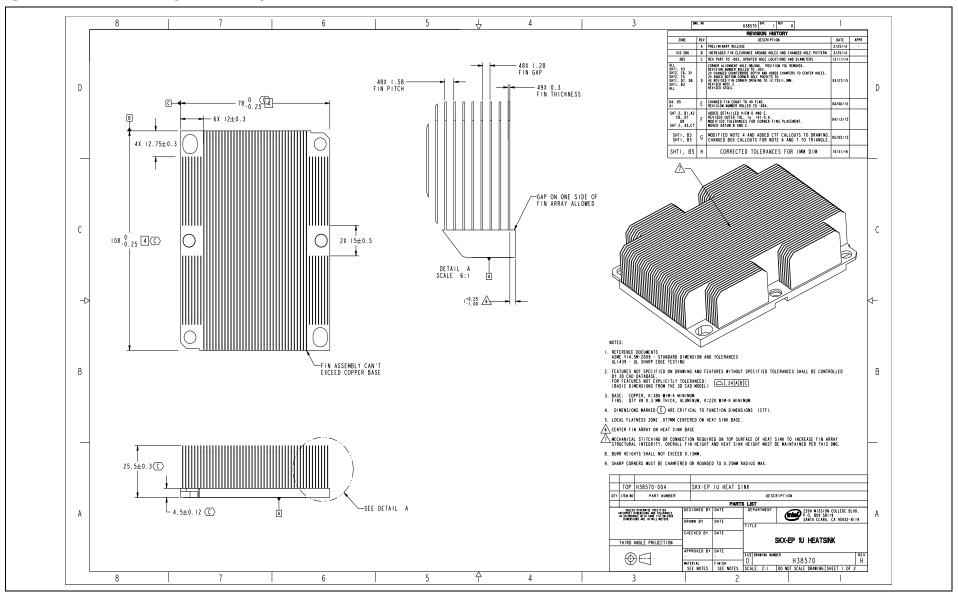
1U Heatsink (Sheet 2 of 2)
